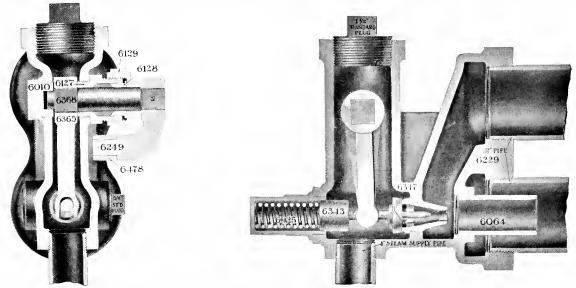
Baggage Car Injector and Indicator. See also Fig. 2047.
